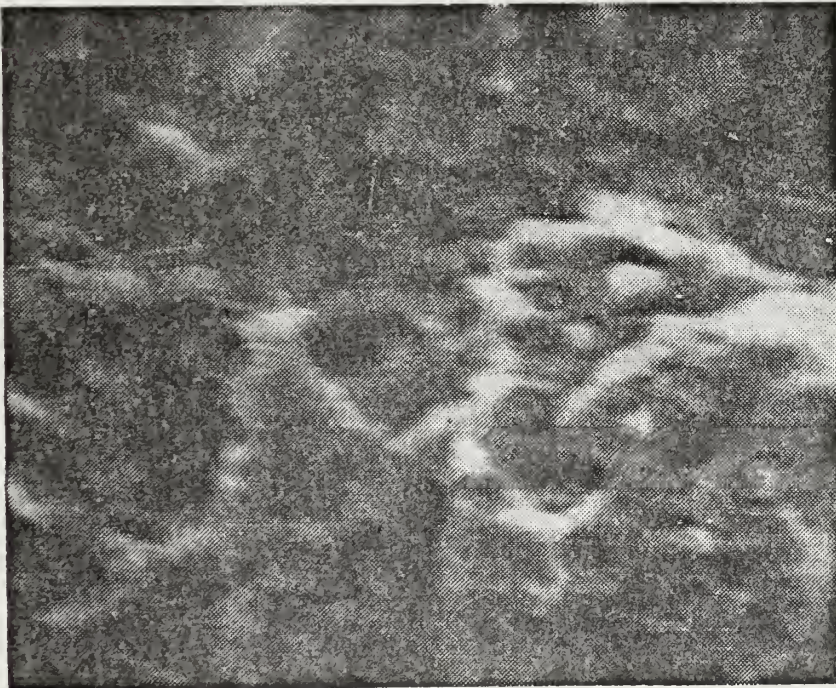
Higher magnification view of the area in Fig. 57, outlined by rectangle, showing large irregular dimples on intergranular fracture surfaces. X5000.
